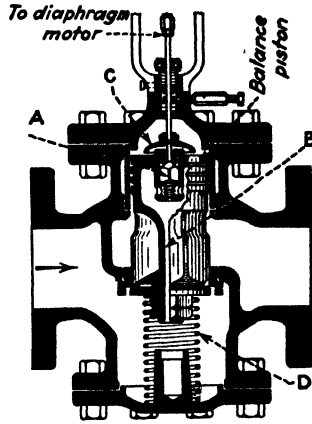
Pressure to balance the valve disk is admitted on initial stem movement. (Courtesy of Leslie Co.)
